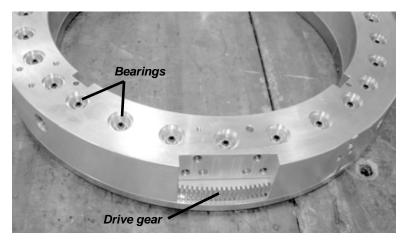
The bearings and drive gear are enclosed in the LCSF frame. The pinion housing covers the drive gear when installed.
